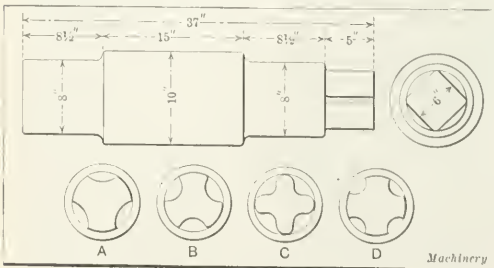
Typical Roll with Dimensions, and Several Types of Wabblers
